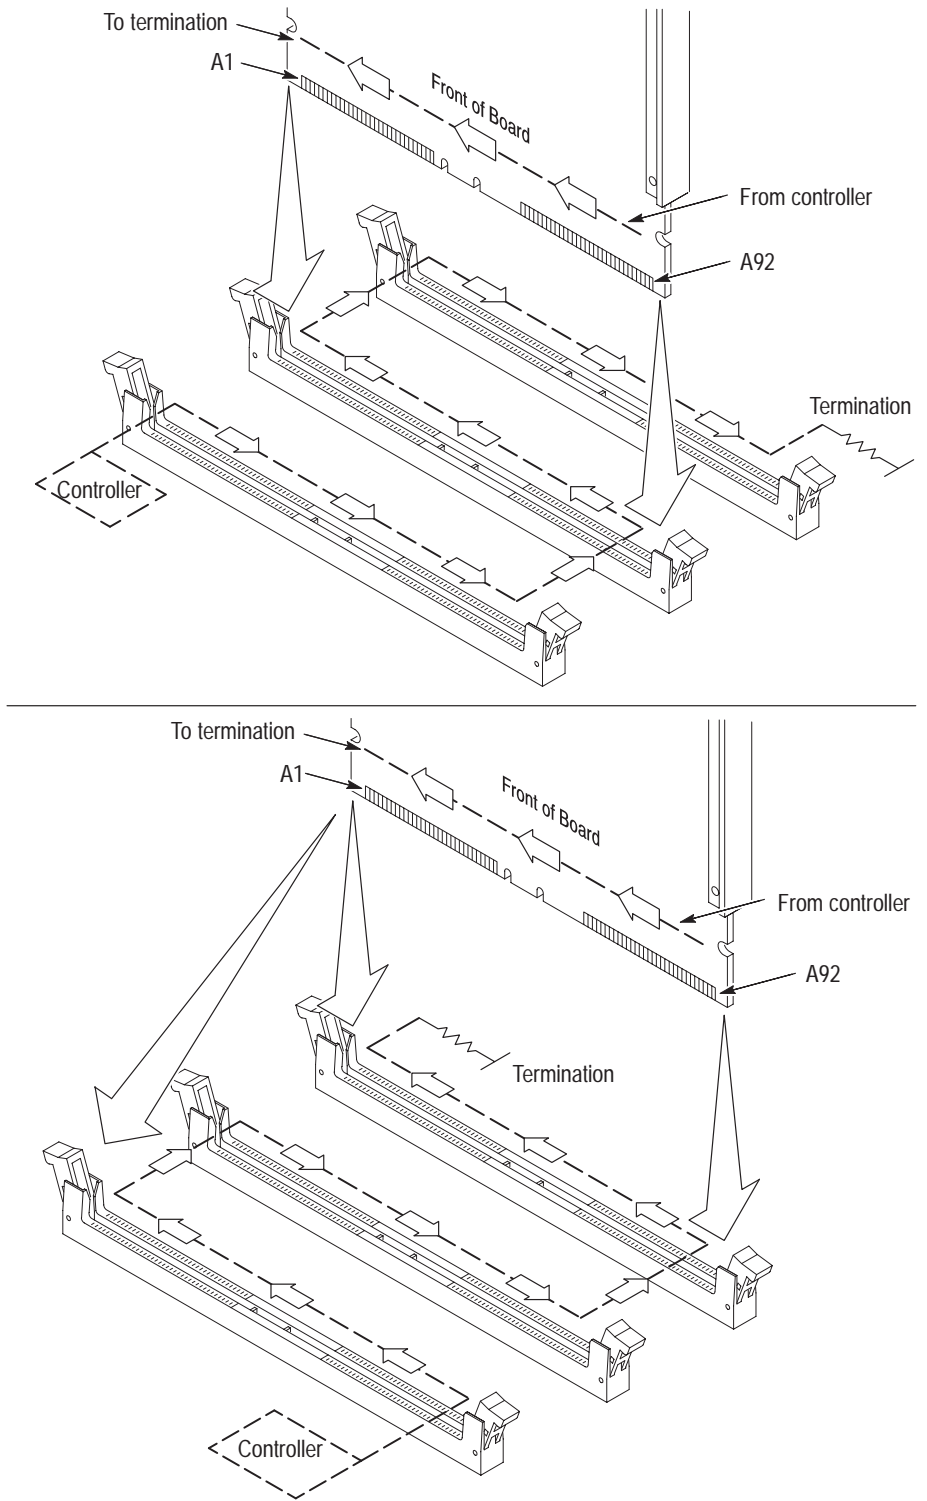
Identify slot(s) for probe adapter insertion (front of board)
